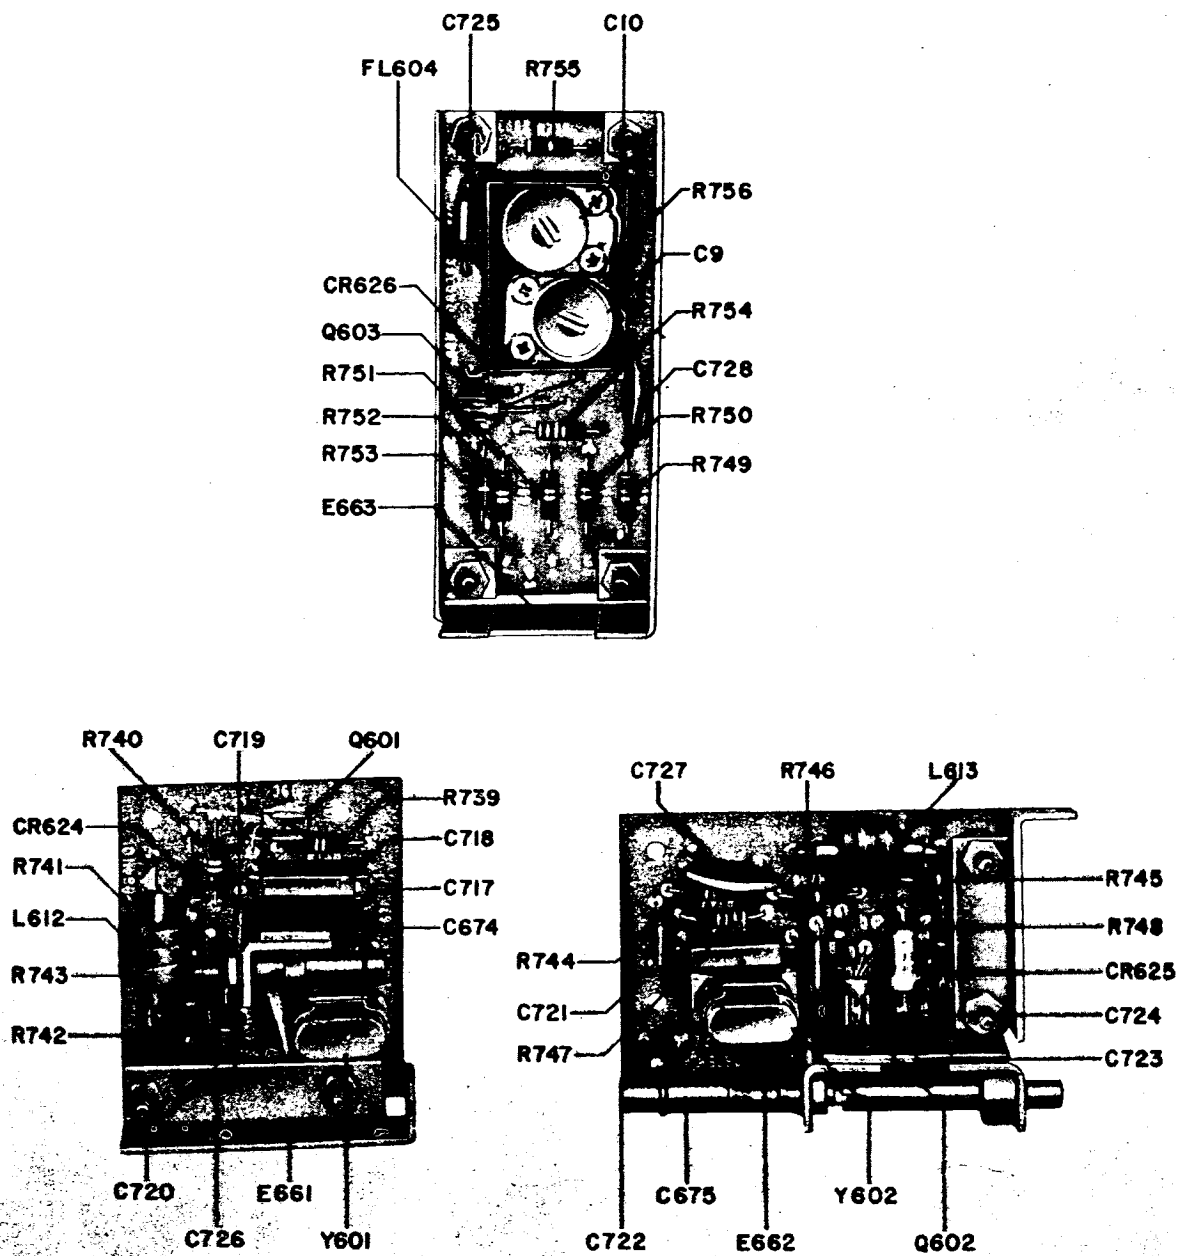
Electrical Frequency Control C-2861/WRT-1, Location of Parts on Printed Board—E661, E662, E663
